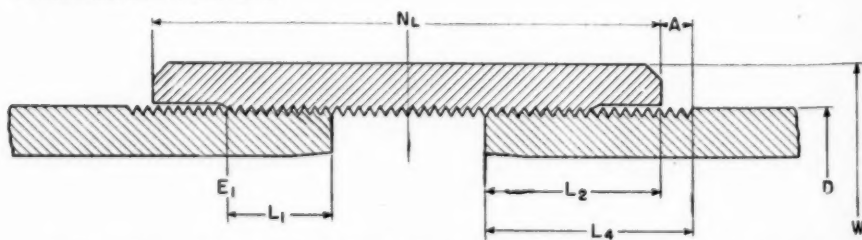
Hand Tight Assembly Dimensions for Use with Accompanying Table VIII.
